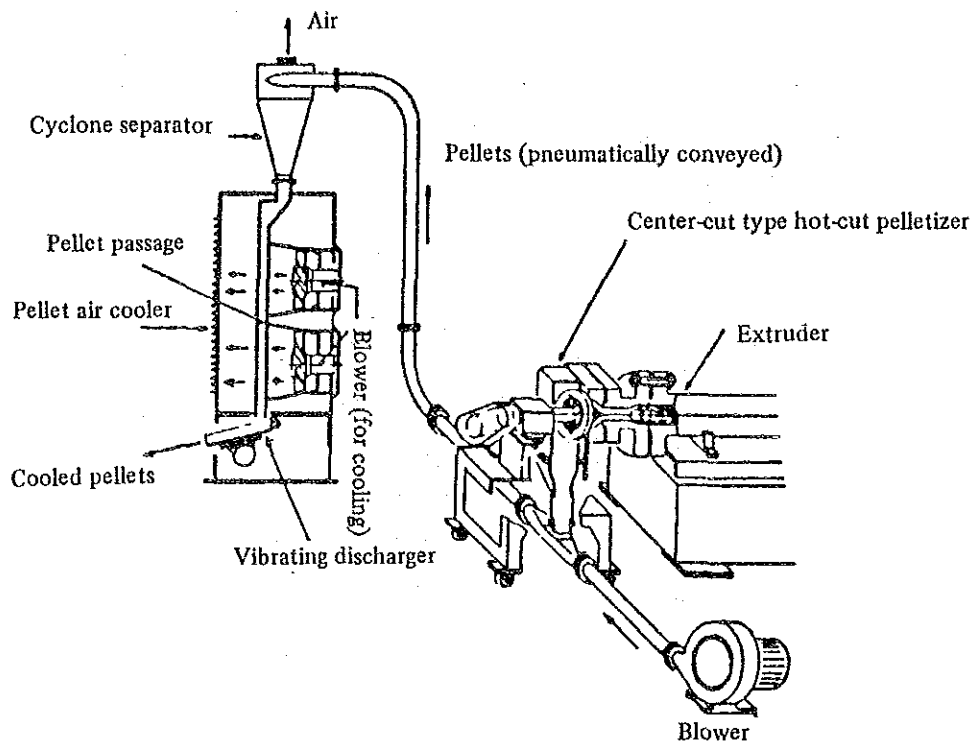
Hot-Cut Pelletizer (Cut-in-air Type)
